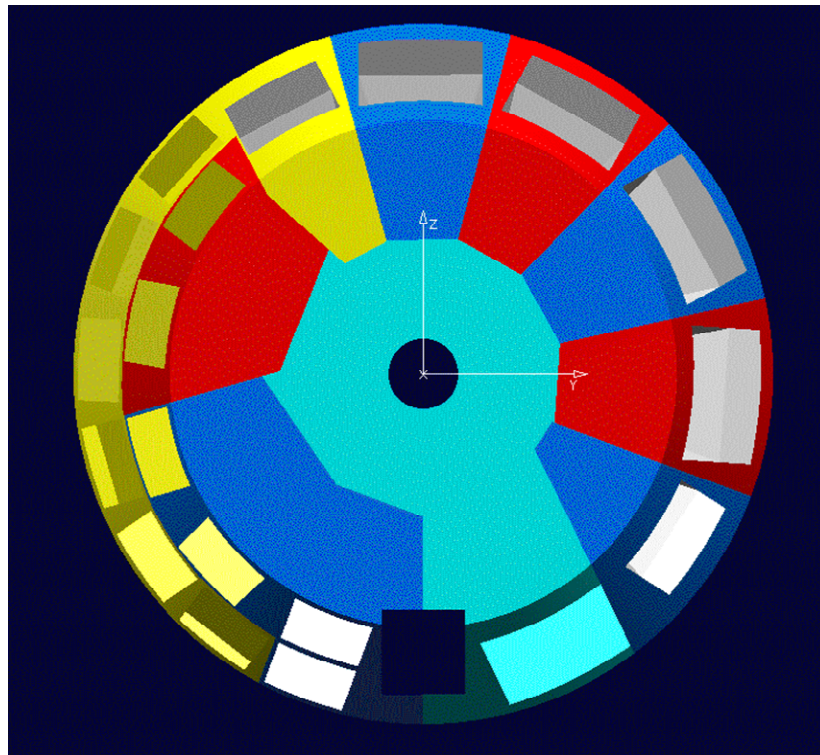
Schematic of wire EDM sectioning cuts made in Honeywell forging disk.
